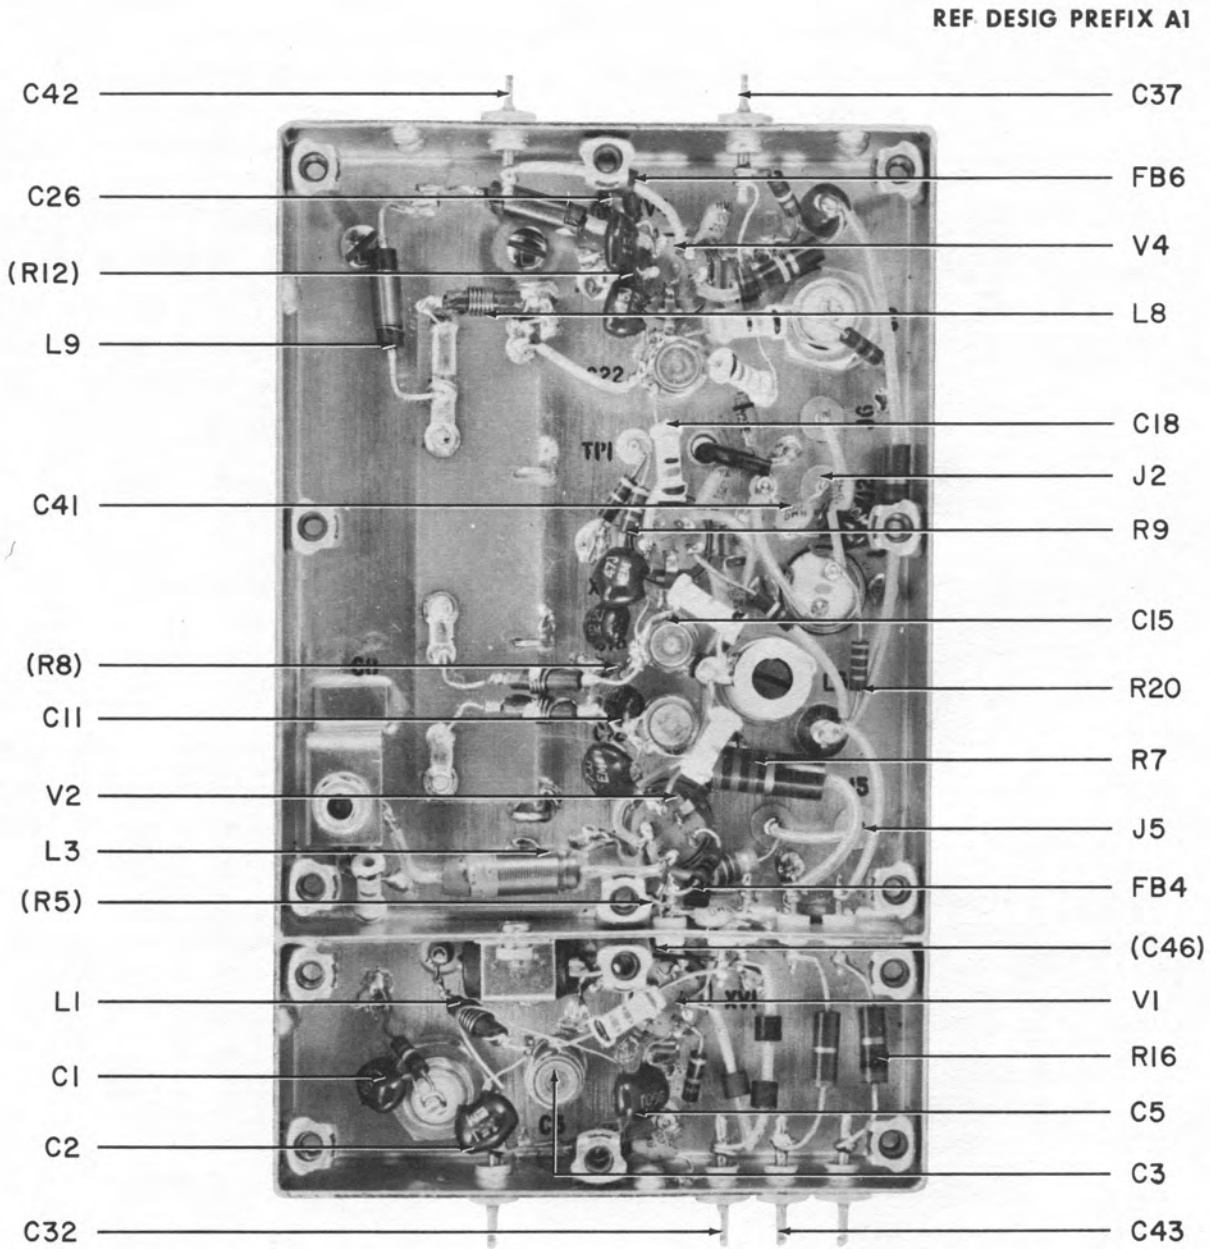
Type 7103 30-90 mc Tuner, Component Locations
